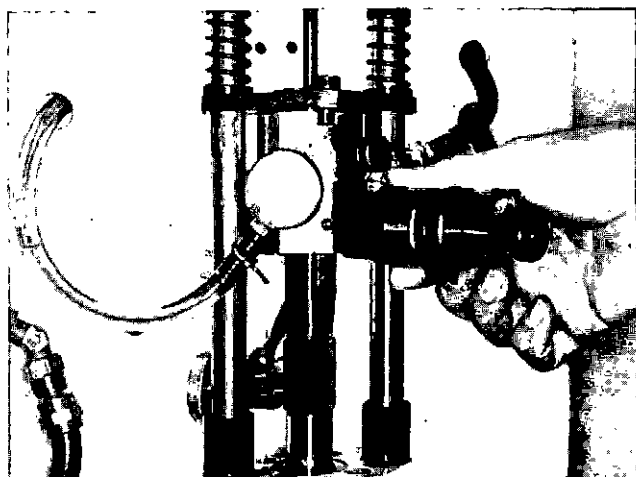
, (F60215). Assemble the ST-708 Tool to the adapter pot
